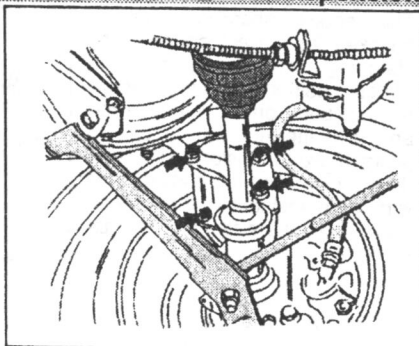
Remove the bolts shown by the arrows to remove the spring strut from the steering knuckle. Suspension arm, steering knuckle, etc. remain in the suspension when the strut is removed.
